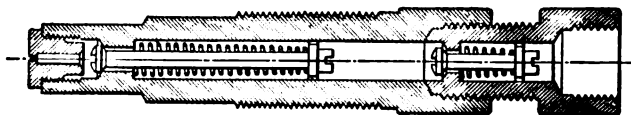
Fuel nozzle for Mietz & Weiss oil engines.
